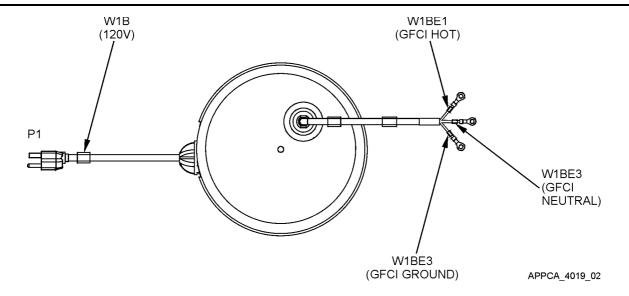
P/N 881318 W1B Cable Assembly (SICPS TENT)
